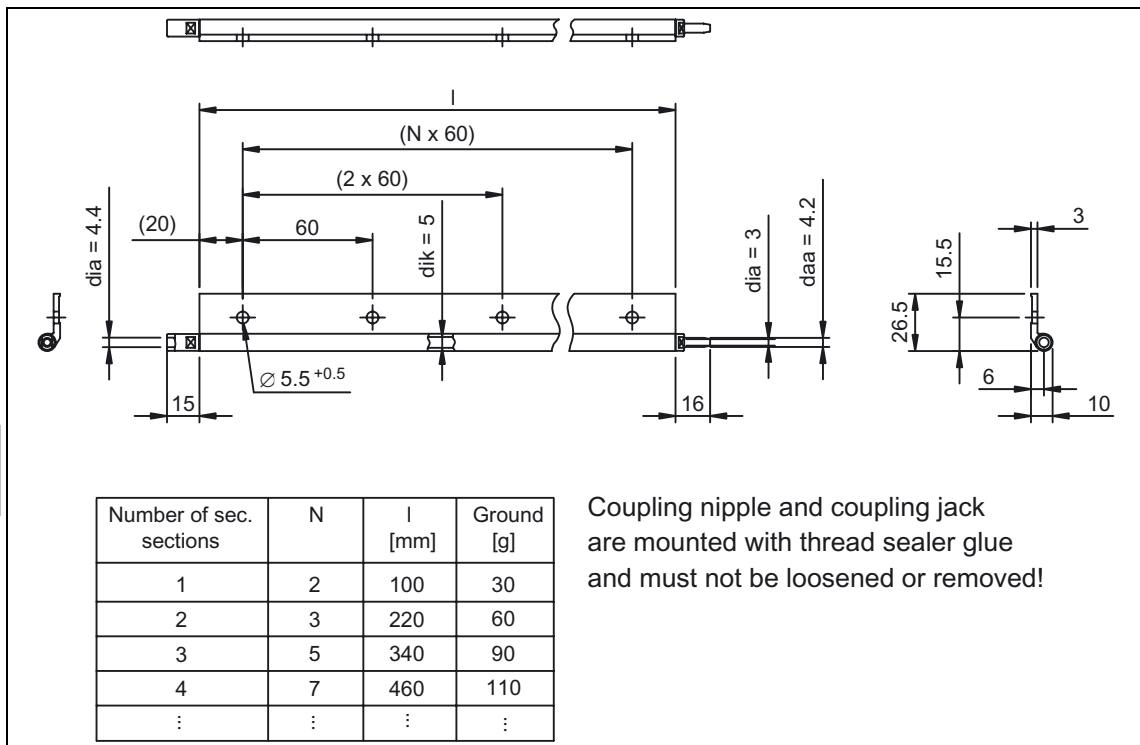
Cooling section with plug nipple for the 1FN3050, 1FN3100 and 1FN3150 motor models
